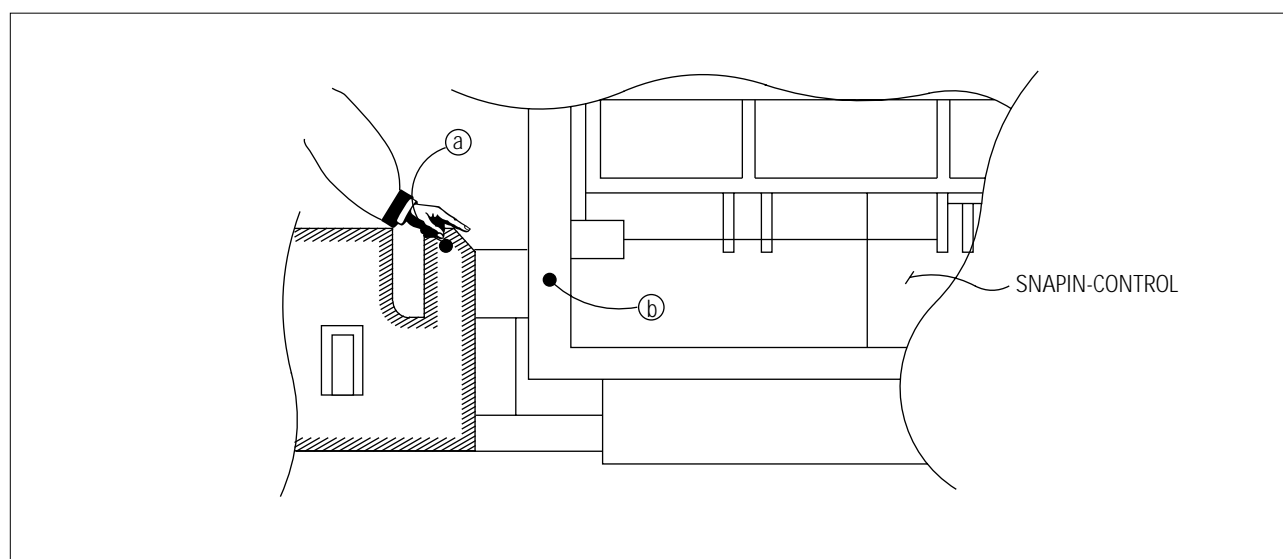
Press the SNAPIN (b) with thumb ; pull the left holder-bracket (a) with index finger
